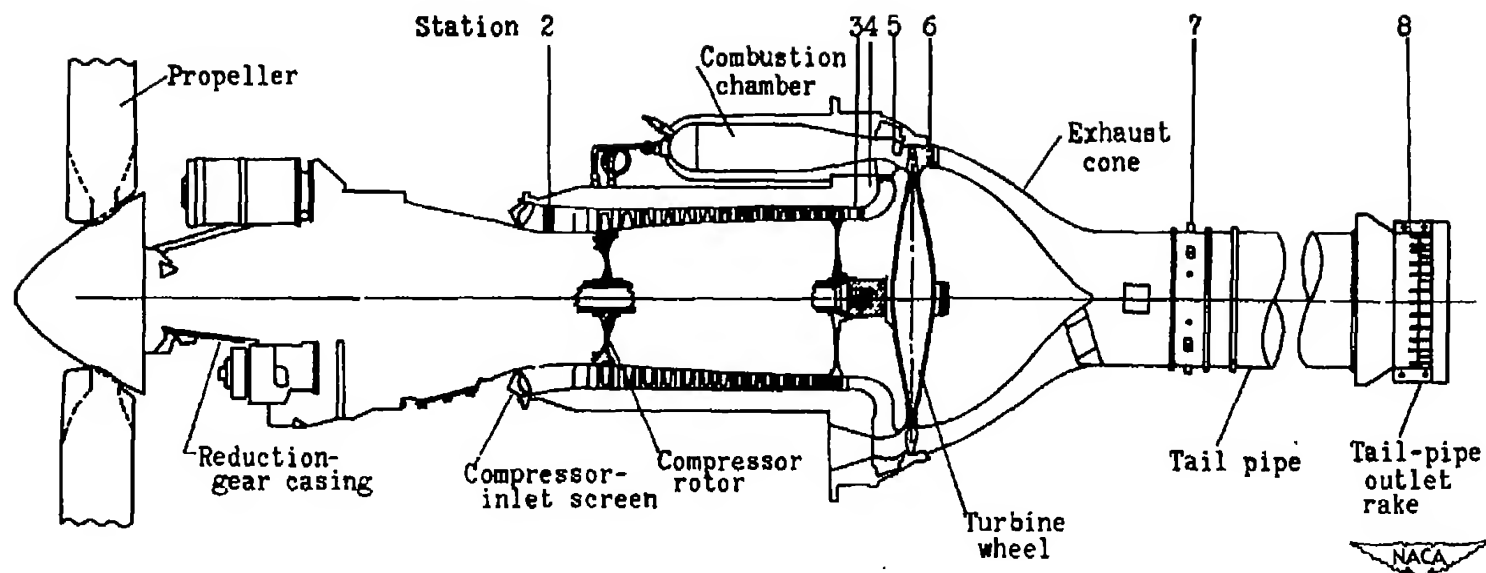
Side view of axial-flow gas turbine-propeller engine showing location of measuring stations.
